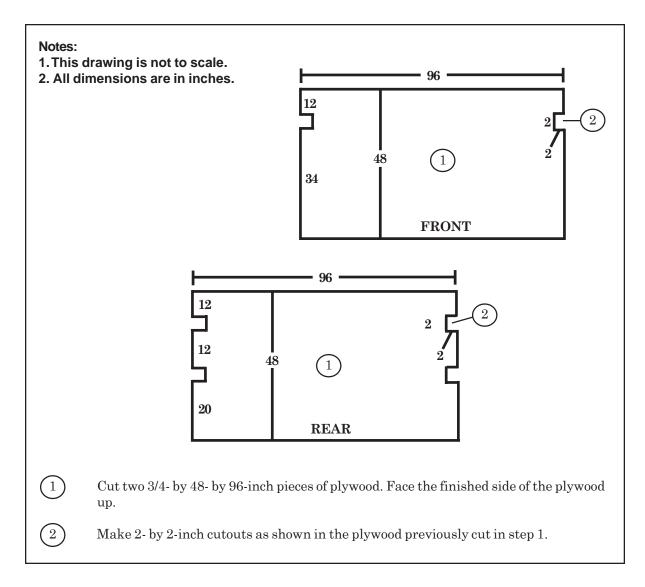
Equipment Box 3 Front and Rear Constructed
